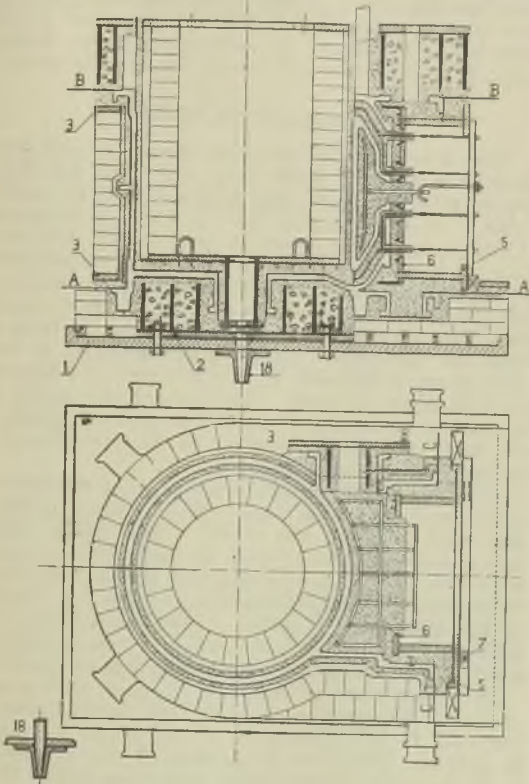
DETAILS OF MARINE ENGINE CYLINDER MOULD.
